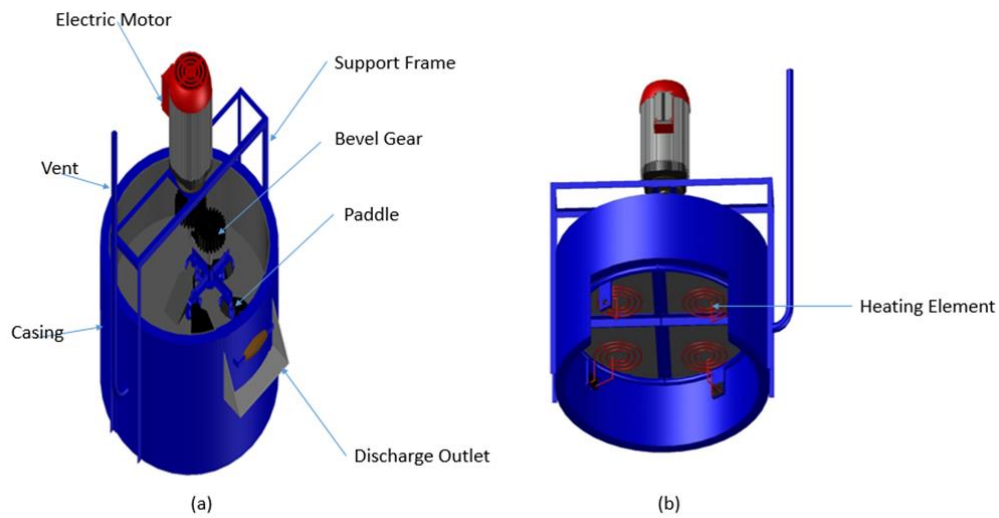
(a) Isometric view of garification machine (b) Bottom view of garification machine
